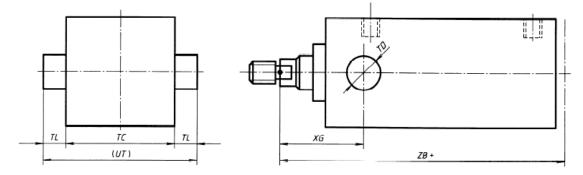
MT1 — Head mounting, integral trunnion (male)
